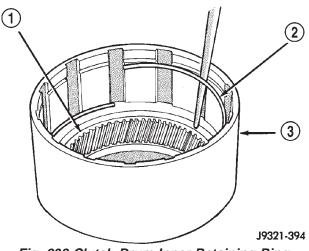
Clutch Drum Inner Retaining Ring Installation
